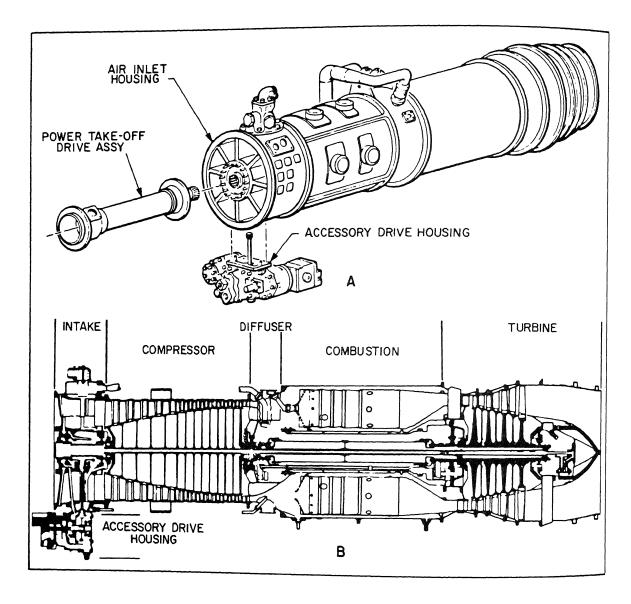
Allison 501-K17 gas turbine engine; (A) overall view, (B) cutaway view.
